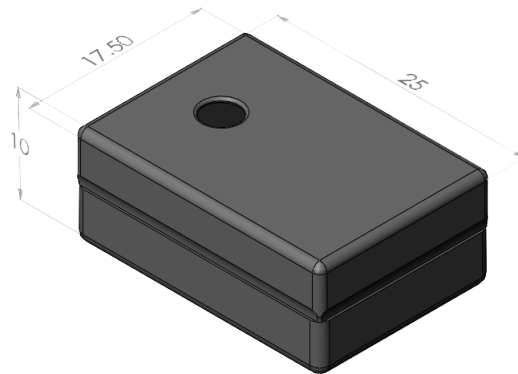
CAD model of the casing with the following dimensions: $25 \times 17.50 \times 10 \text{ mm}^3$.
